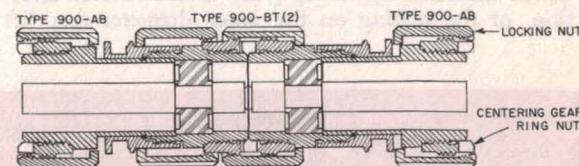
Representative two-port test section fabricated with the Type 900-AB Connector Kit.
